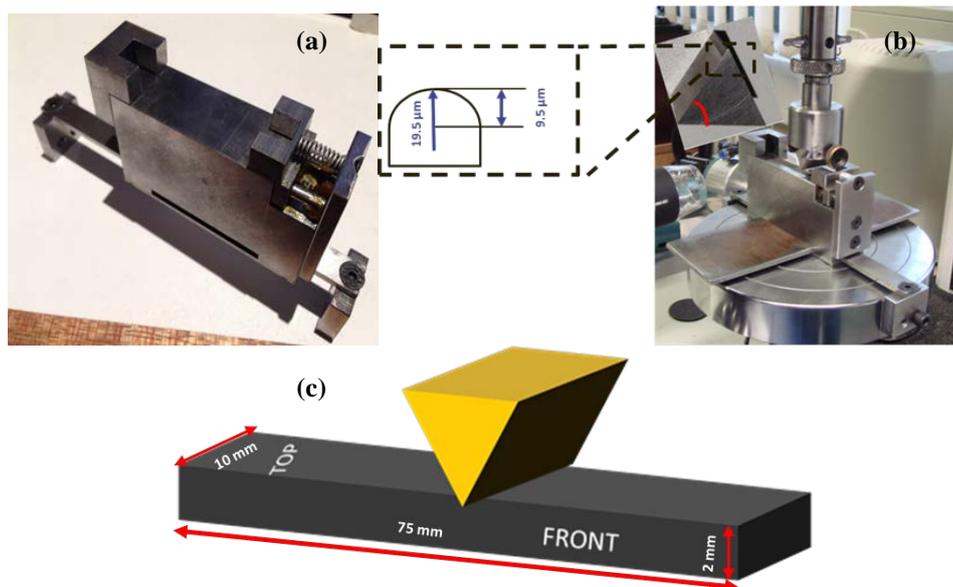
(a) Designed fixture; (b) experimental setup for wedge indentation (Inset image: wedge indenter and its dimensions) (c) Schematic of wedge-indentation experiment [3]
